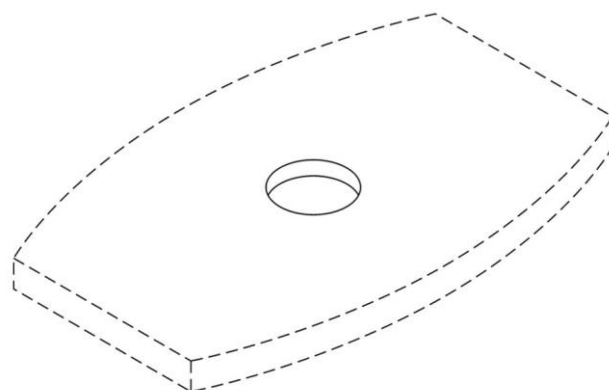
BOTTOM THREE-DIMENSIONAL VIEW
